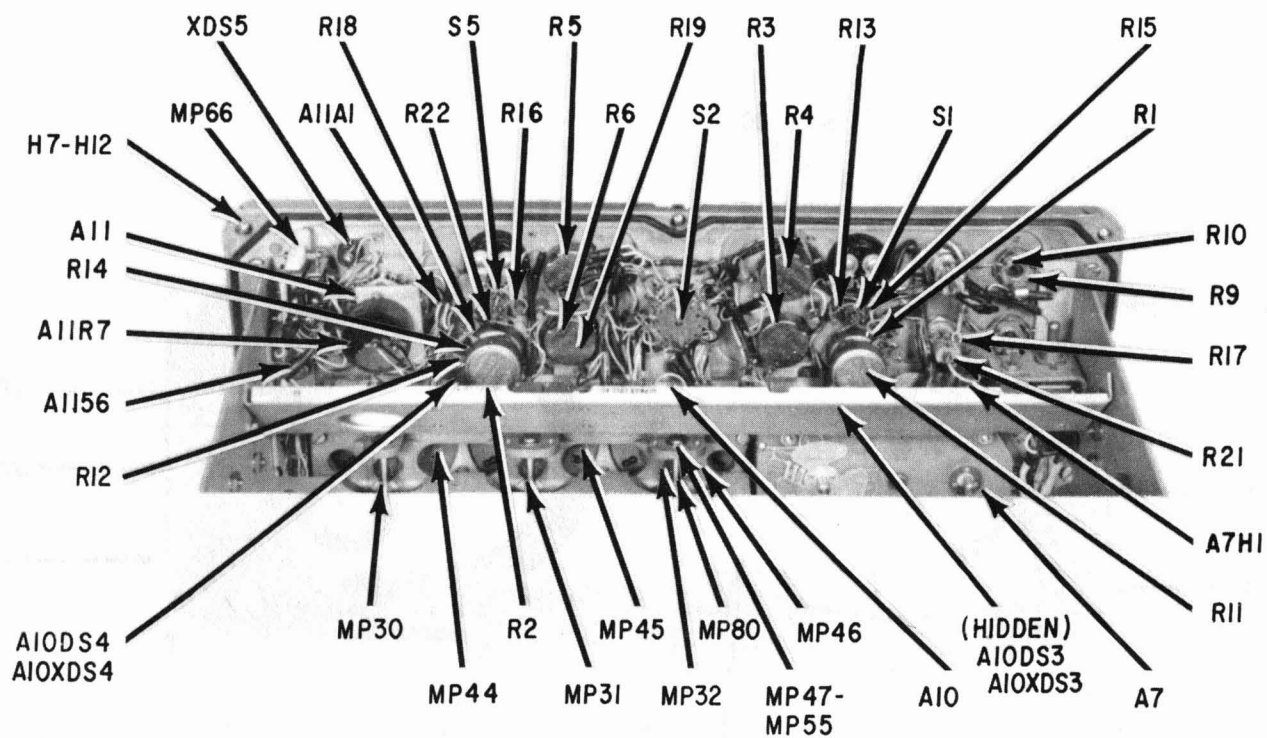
R-1051/URR Front Panel Assembly, Rear View, Component Location
